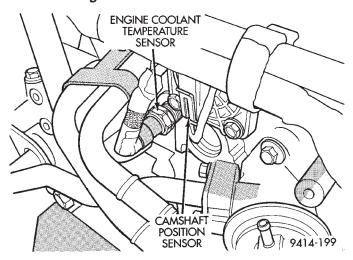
Camshaft Position Sensor and Engine Coolant Temperature Sensor—2.0L Engine
